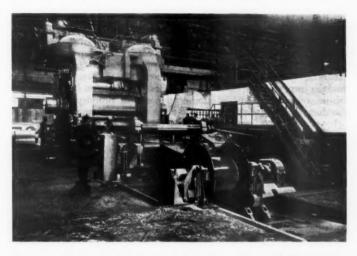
A modern $20\frac{1}{2}$," and 53" \times 80" 4-high reversing cold mill. Rolling strip up to 74" wide in coils up to 10 tons in weight, this is the largest mill of its type in Britain.
